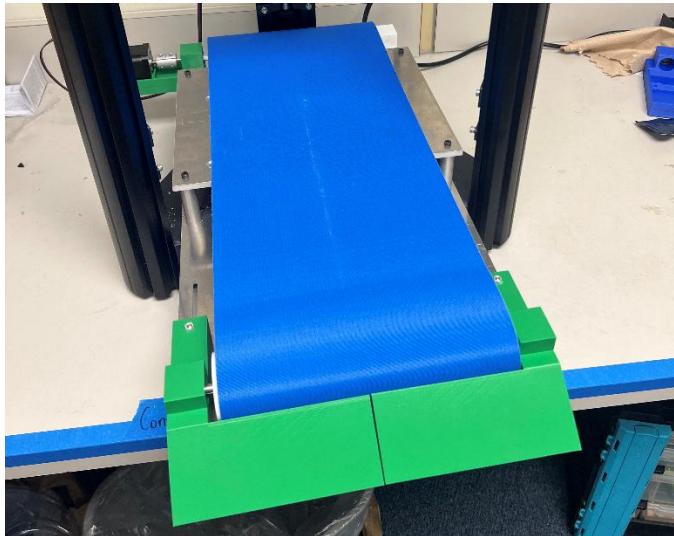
Completed printer modification assembled and installed on the FLSUN SR printer in the GatorKits Lab workspace.
